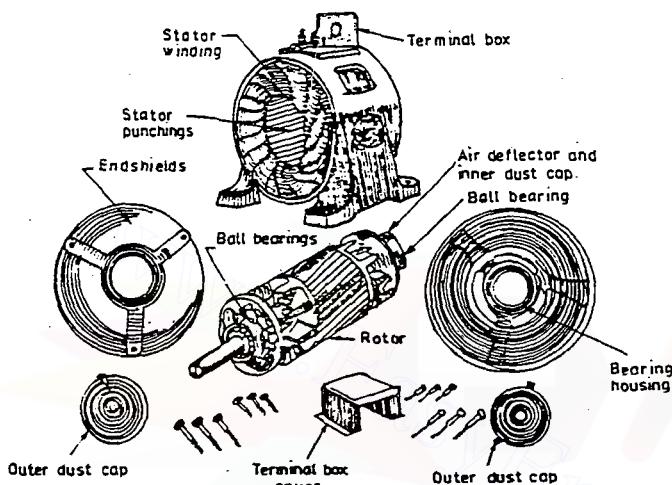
Component parts of a small squirrel-cage induction motor.
